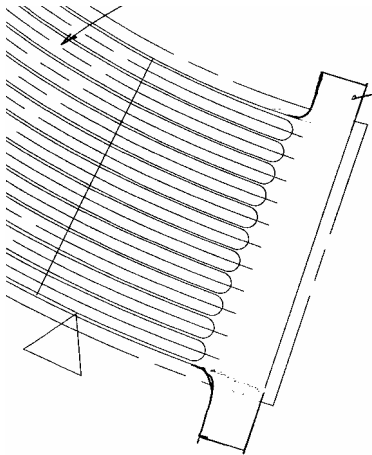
Pre-fabricated slice with special end section for electron beam welding.
